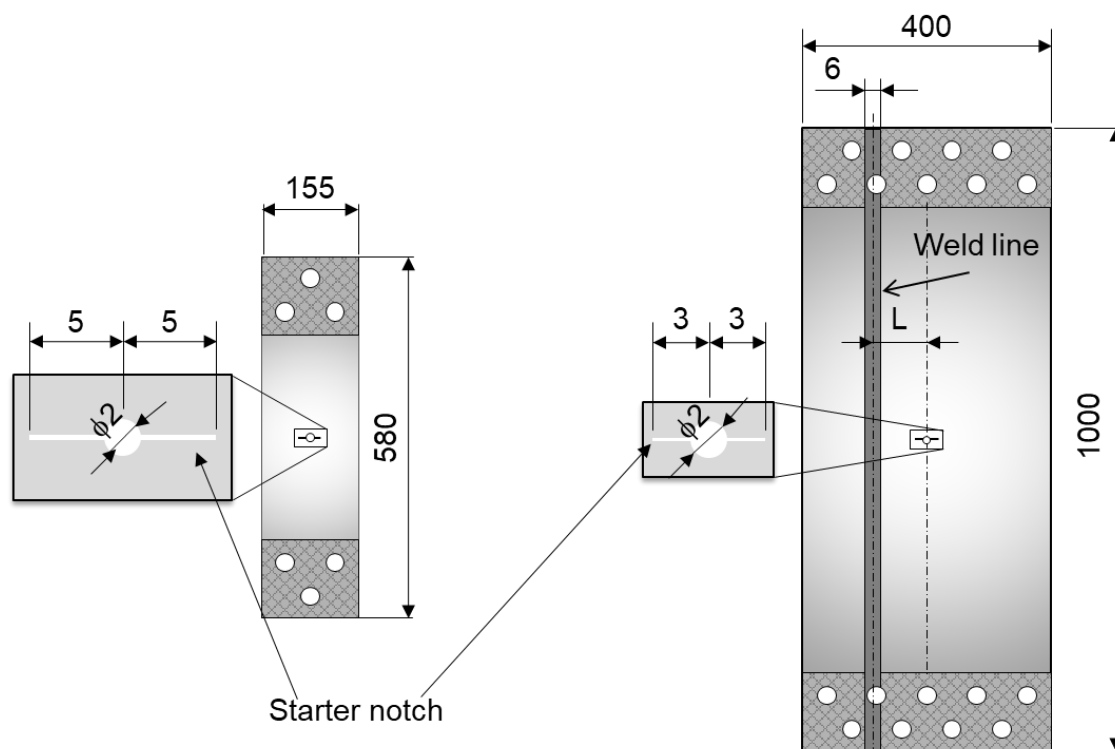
Geometry of the fatigue crack growth specimen
